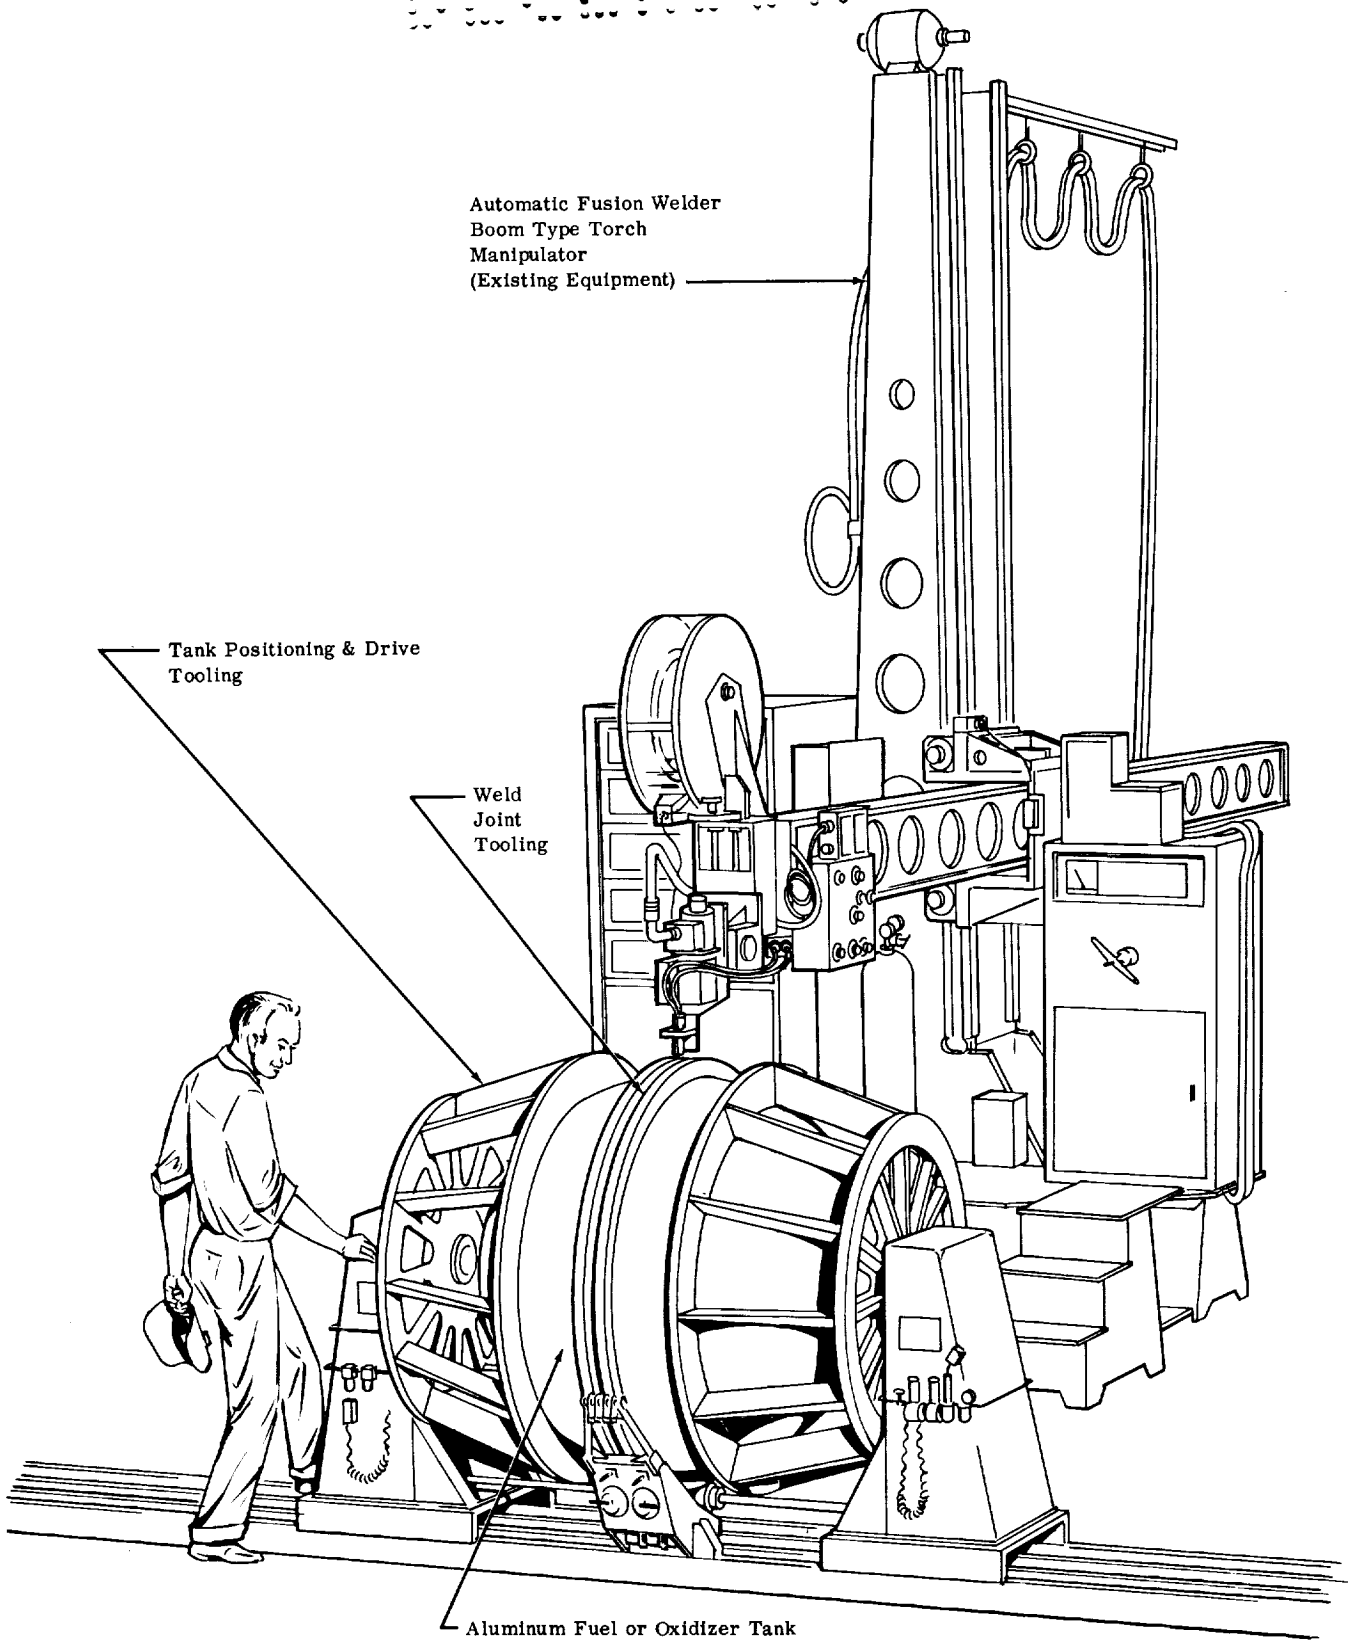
Automatic Fusion Welding of Aluminum Ascent Tanks
